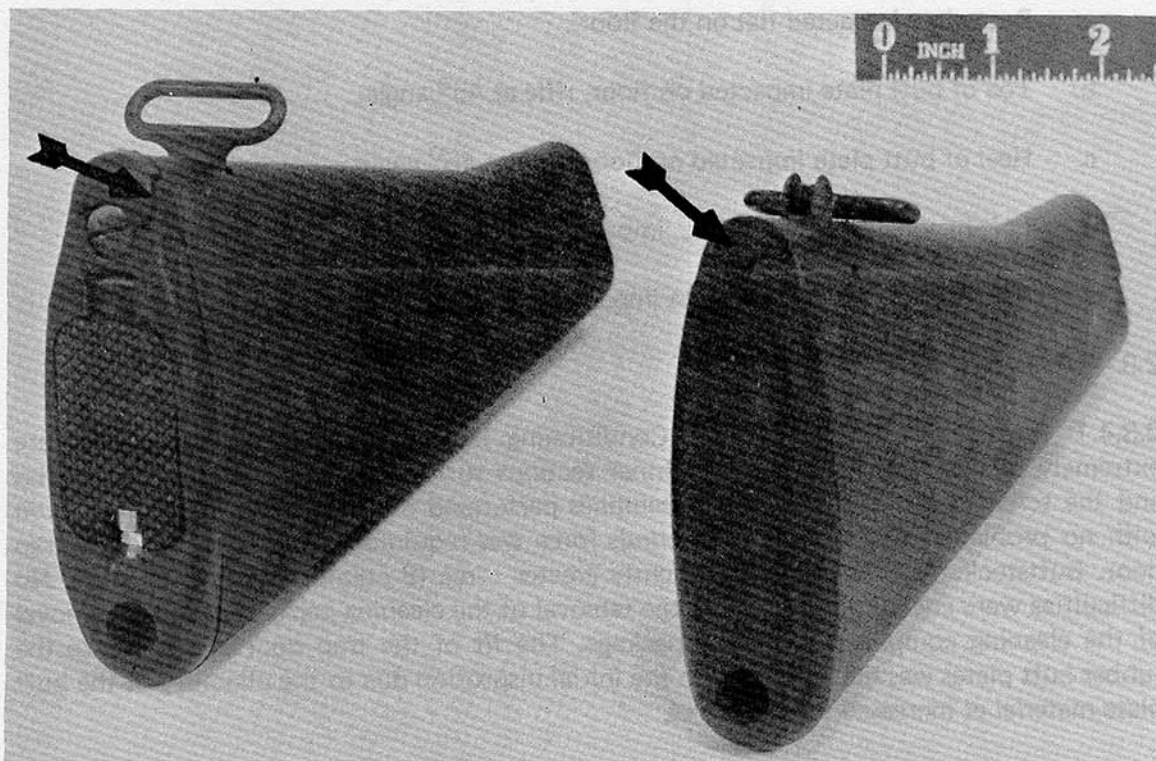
Butt Plate Damage After Rifle Grenade Firing in Hot Test (+155°F). LEFT: Modified Buttstock 3M. RIGHT: Control Buttstock 13.
